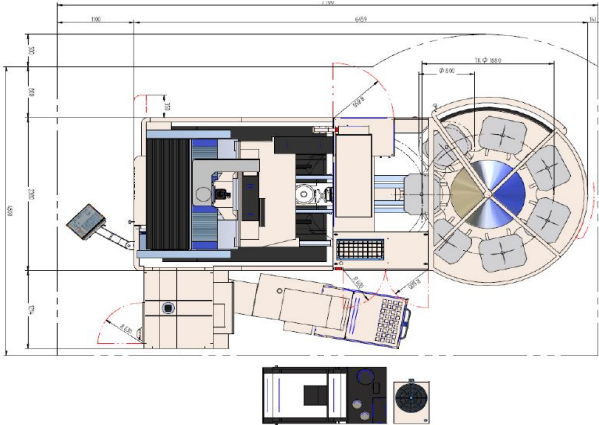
Schematic representation of the pallet system from the back side of the machine [30]
